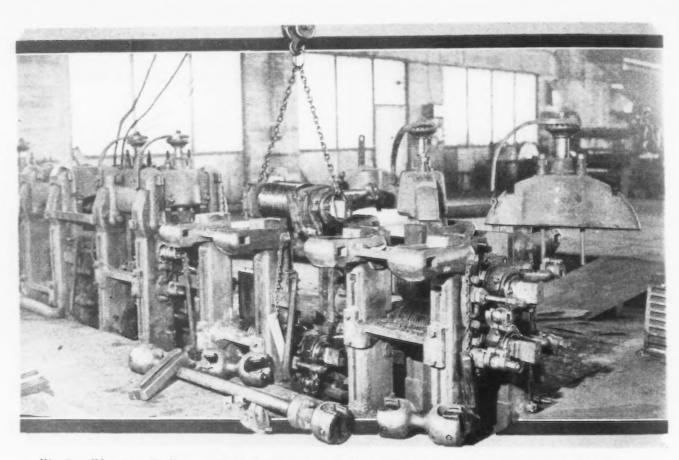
Changing Rolls in a 10-In. Three-High Rolling Mill Equipped with SKF Roller Bearings
